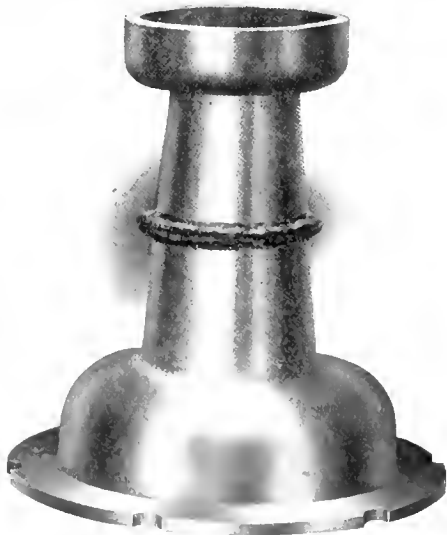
Electric Weld on Automobile Pinion Casing
